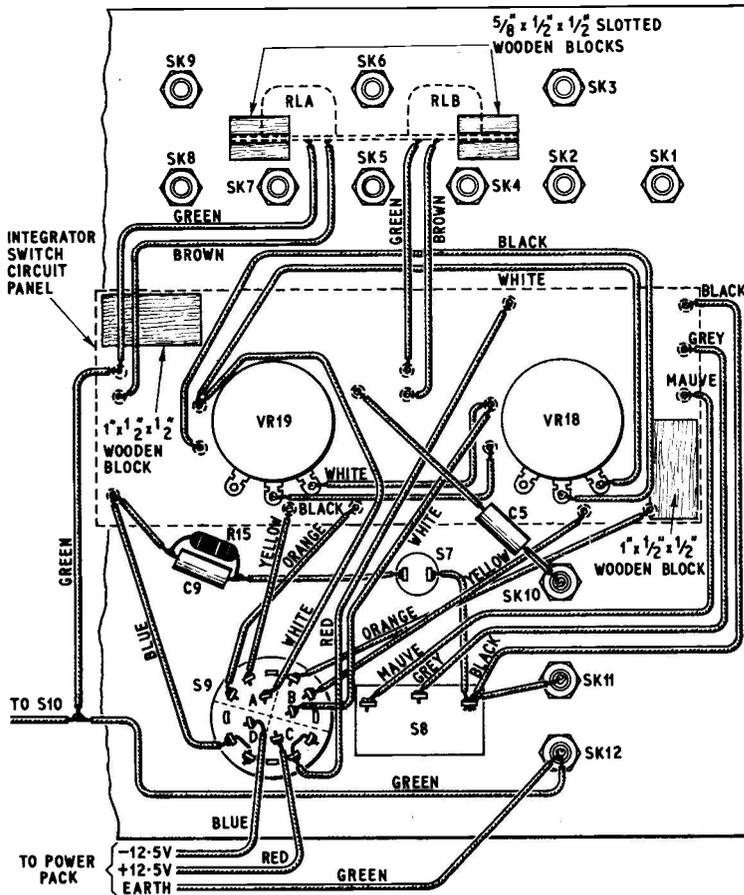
Rear view of UNIT "B" front panel showing integrator switch wiring
